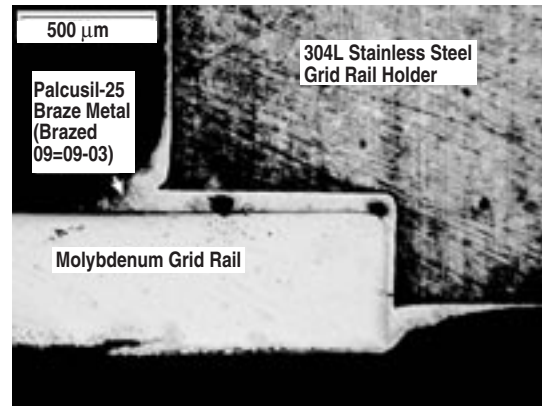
Photomicrograph of section of joint produced by test braze of molybdenum rail to stainless steel rail holder showing full penetration of Palcusil-25 braze metal.
